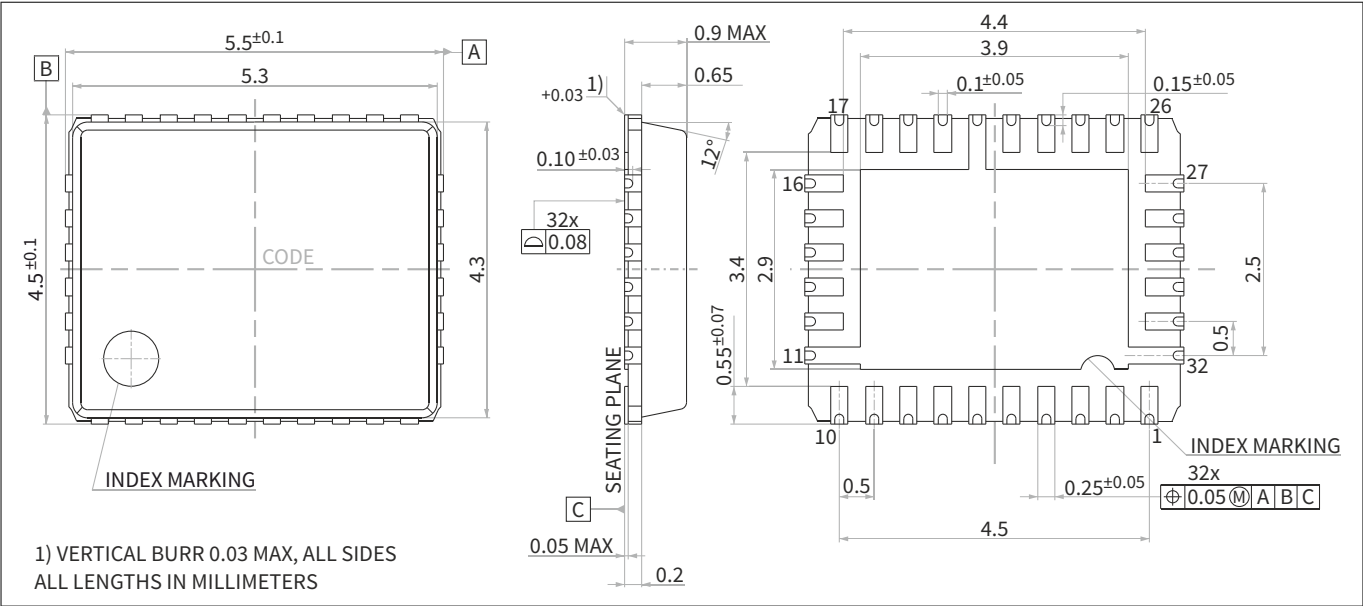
Package outline with top, side, and bottom view of VQFN-32-9.
